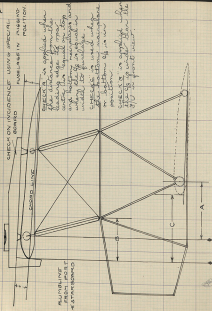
CHECK ON TAIL PLANE IN SIDE ELEVATION
